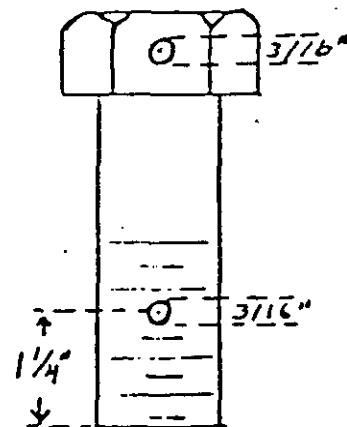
Bolt with Holes for Tamper Indicating Seals.
